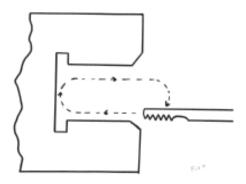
This is the motion that I make with the inside chaser to cut the threads. The chaser should just cut clean into the recess and must be lifted clear before the chaser end hits the bottom of the hole. This is why it is more difficult to chase threads with fewer teeth per inch. The chaser is moving so much faster it is difficult to lift clear before the bottom of the hole is encountered.
